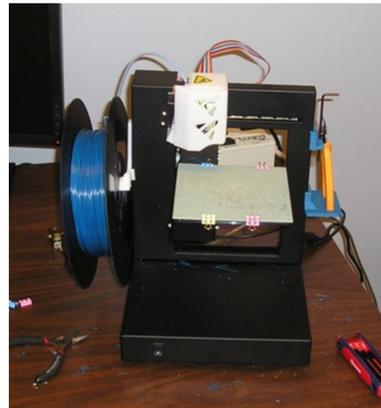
3-D Rapid Prototyping Machine used to print tractor-trailer
